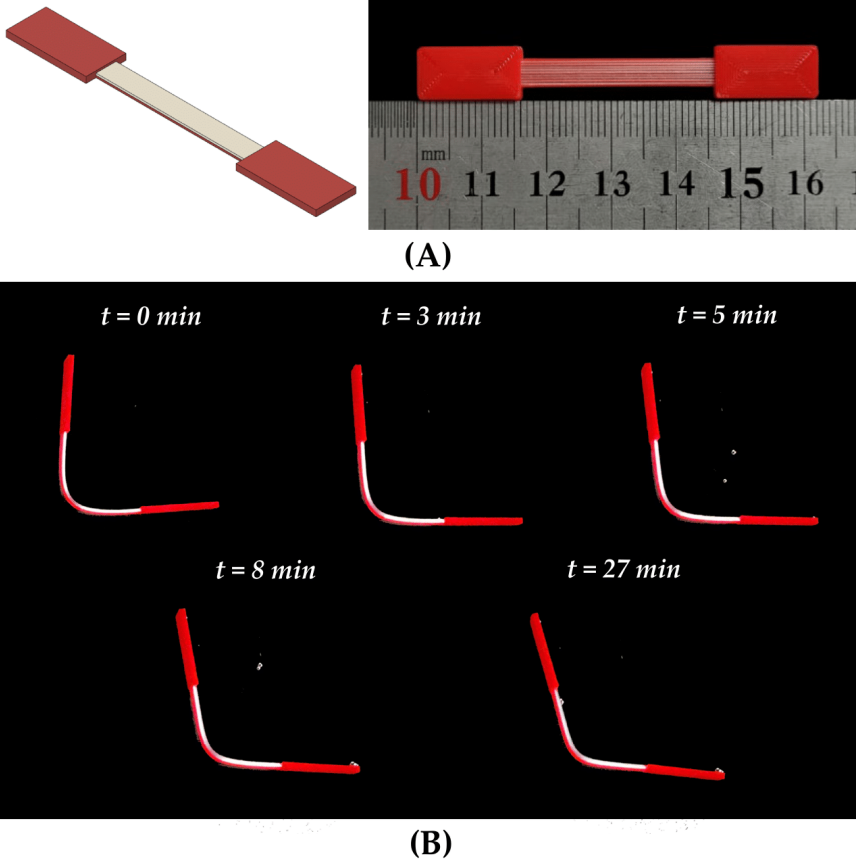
(A) CAD models & prototypes and (B) shape-morphing test for actuator 23.
